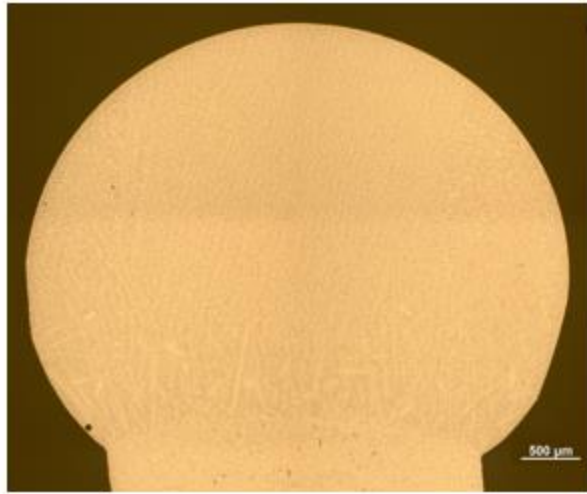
Typical weld cross-section showing bead shape of edge weld.
